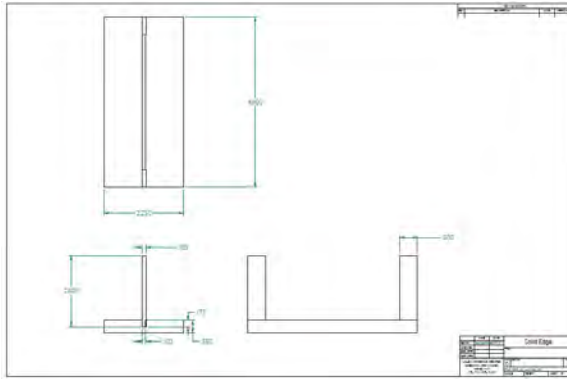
Solid Edge drawing of 3D printed pod base.
